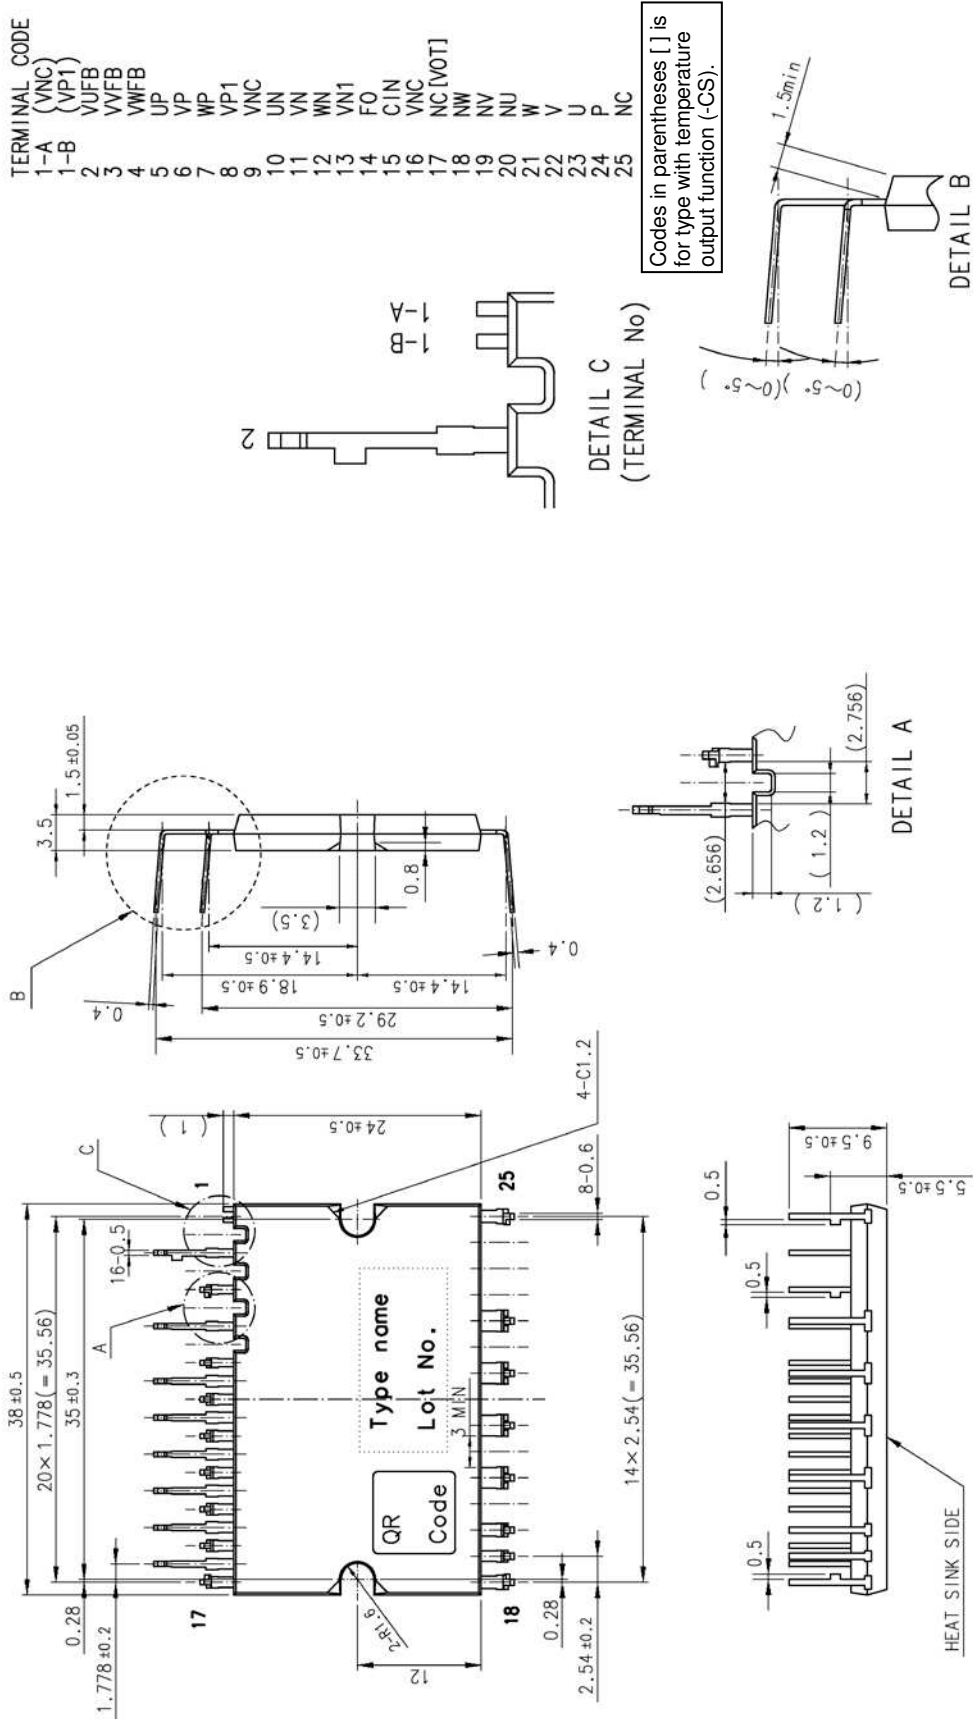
Zigzag pin type package(-CS/-CST) outline drawing
